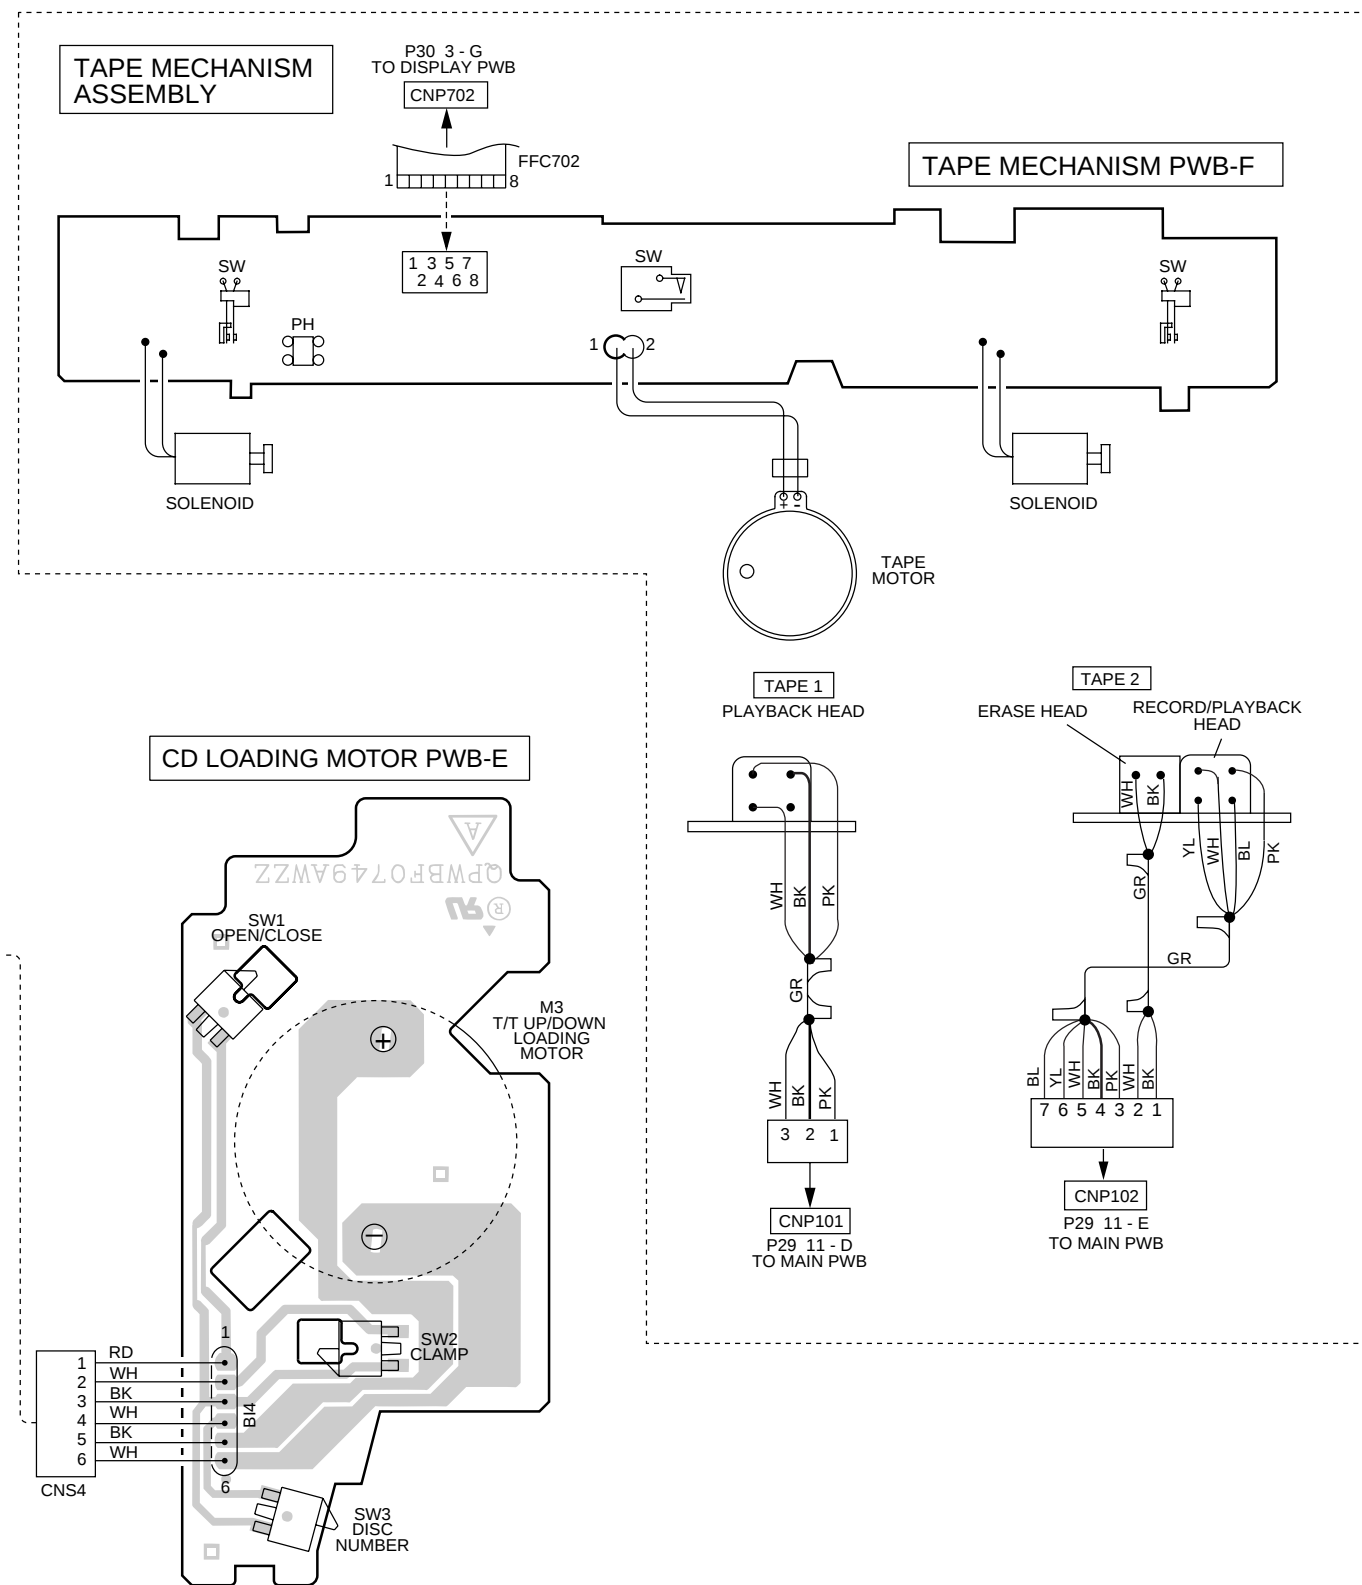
WIRING SIDE OF P.W.BOARD (6/7)
